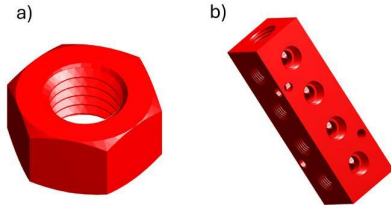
Examples of two parts from the type II category: a) M12 nut; b) flow manifold.
